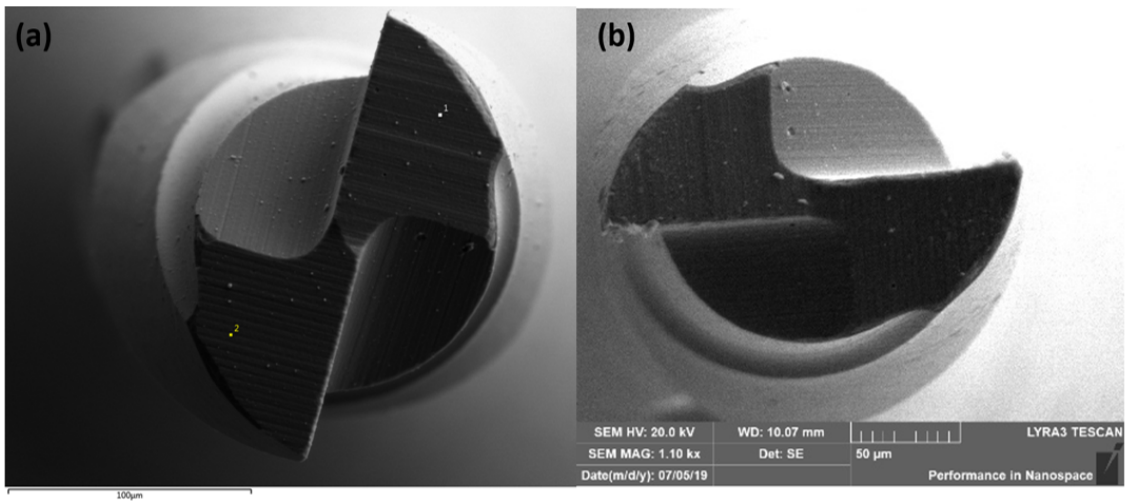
SEM image of HLS 1 (a) before (b) after machining.
